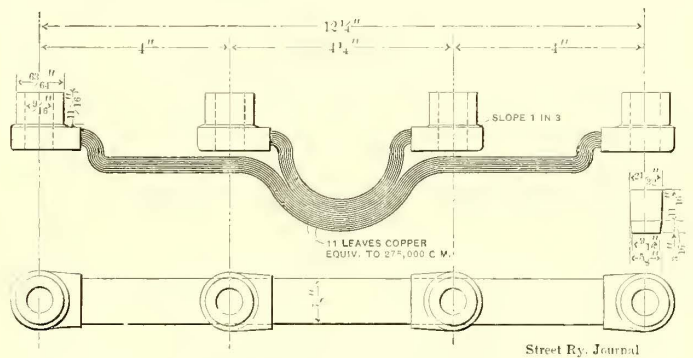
PLAN AND SIDE ELEVATION OF BOND
